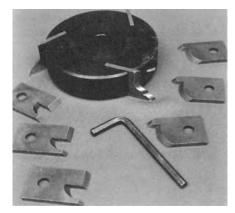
The molder head is a thick, heavy steel disc that has equally spaced slots around its perimeter to receive sets of molder knives. A special 5/8" molder/dado arbor (not shown) mounts the molder head to the Mark V main spindle.
